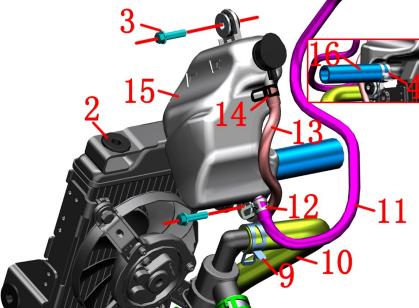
Co	OOLING SYSTEM	Water tank assembly 3	CHK	40)
